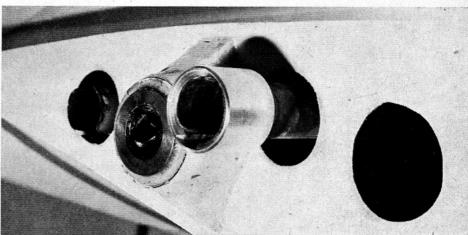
Sleeved joint after modification on BS-1 No. 12.
